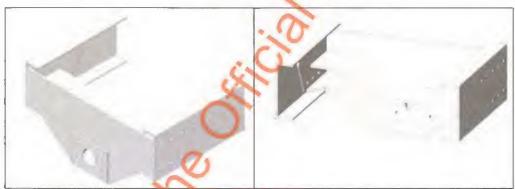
Drawbeam design 18877, Isometric view (left), Isometric view rear (right)
